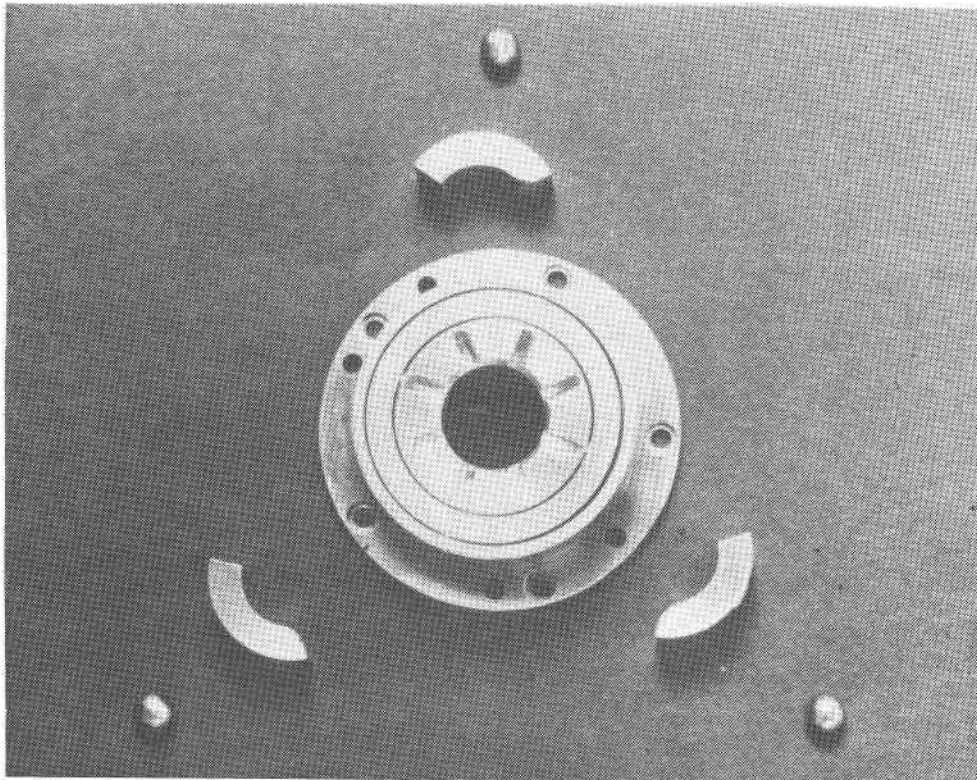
HYDRODYNAMIC THRUST BEARING AND TILTING-PAD RADIAL BEARING SHOES
